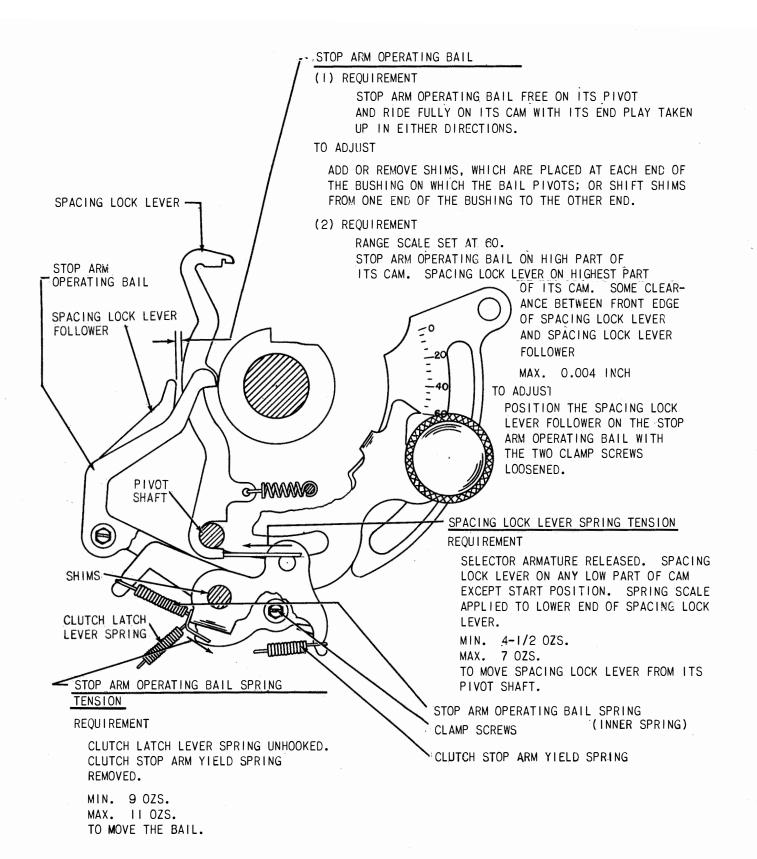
Automatic Typer, Selector Clutch Stop Arm Operating Bail
